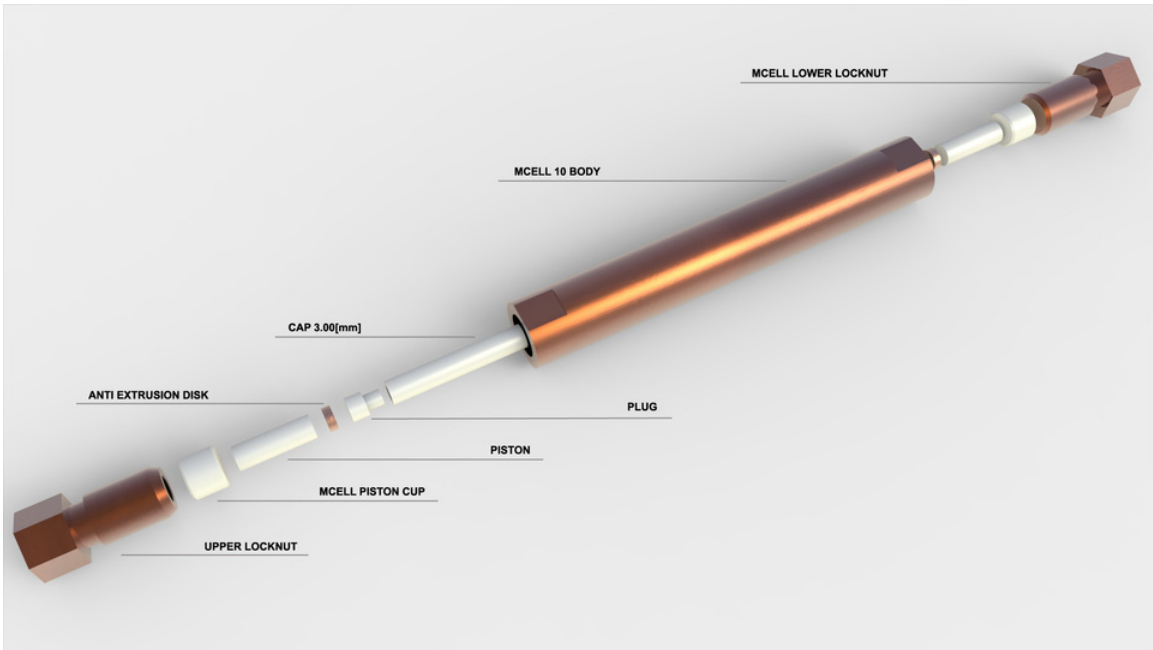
Exploded view of SQUID pressure cell components. Taken from link: <https://grabcad.com/library/mcell-10-high-pressure-cell-1>.
